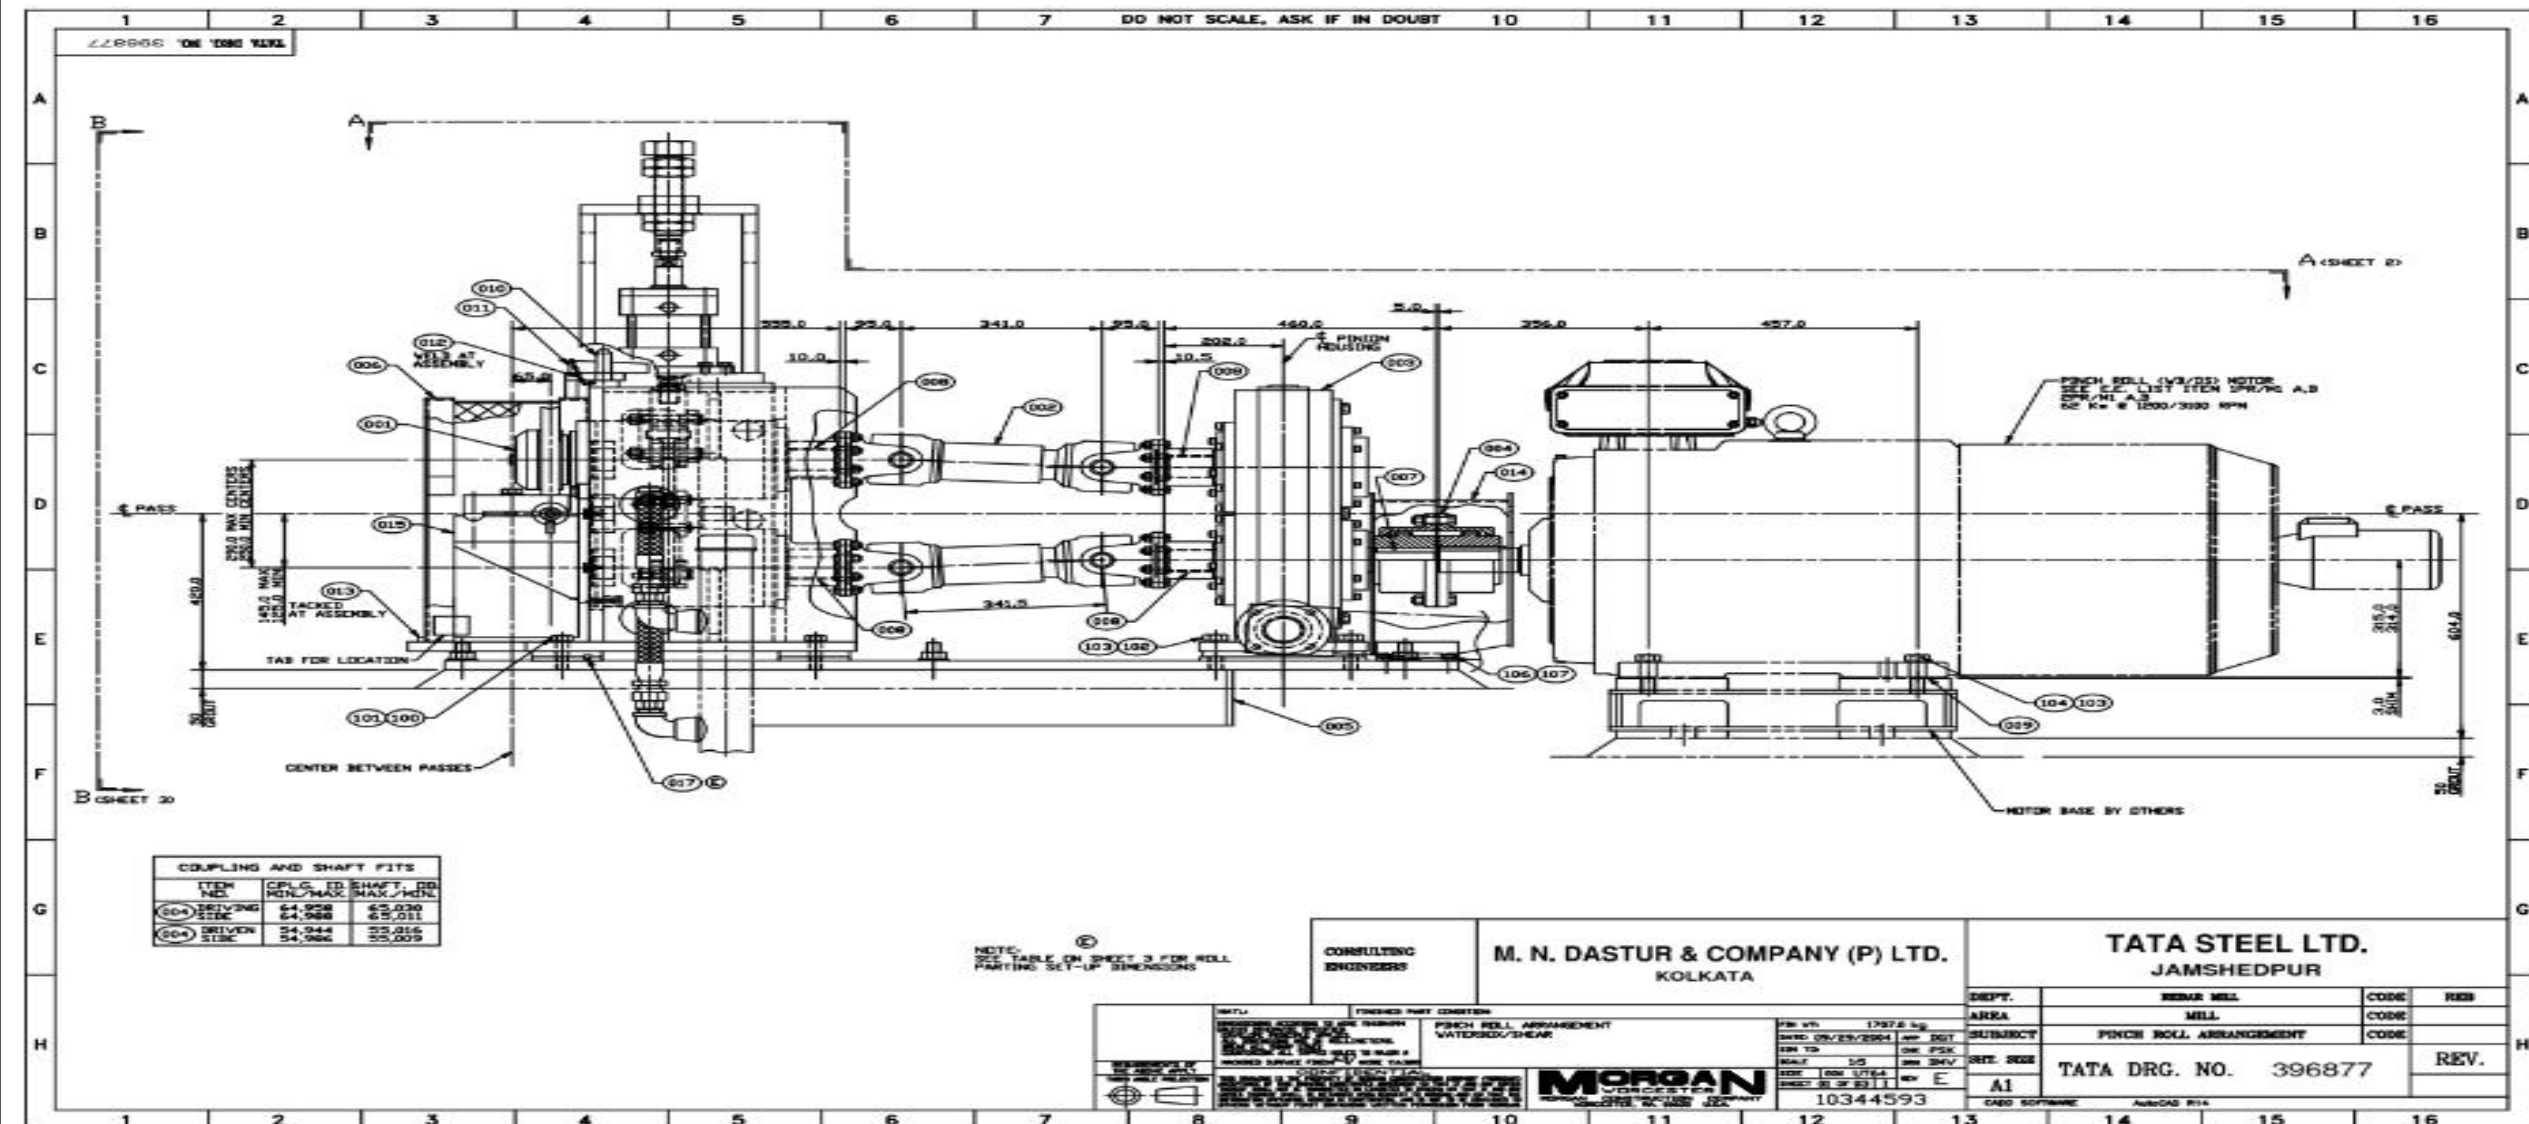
Overview Drawing of A Braking Pinch Roll Arrangement Drawn on AutoCAD
